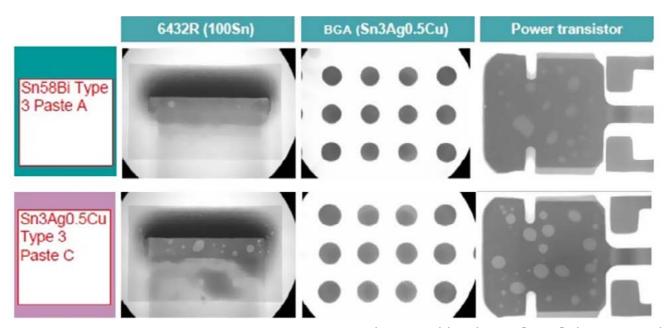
Sn58Bi Paste A versus Sn3Ag0.5Cu Paste C voiding on soldered 6432 [2512] chip, BGA and power transistor components.
